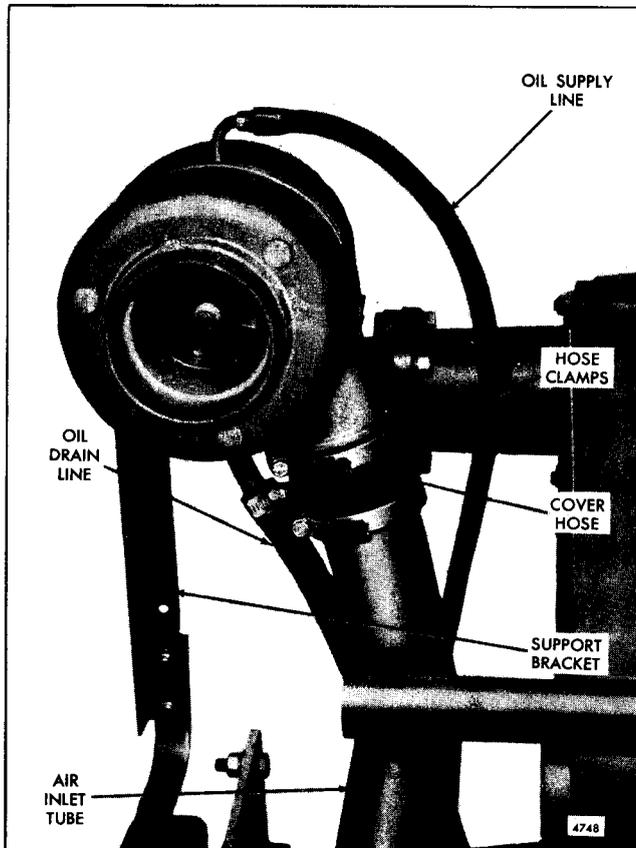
Turbocharger Support Bracket, Oil Lines and Air Inlet Tube
